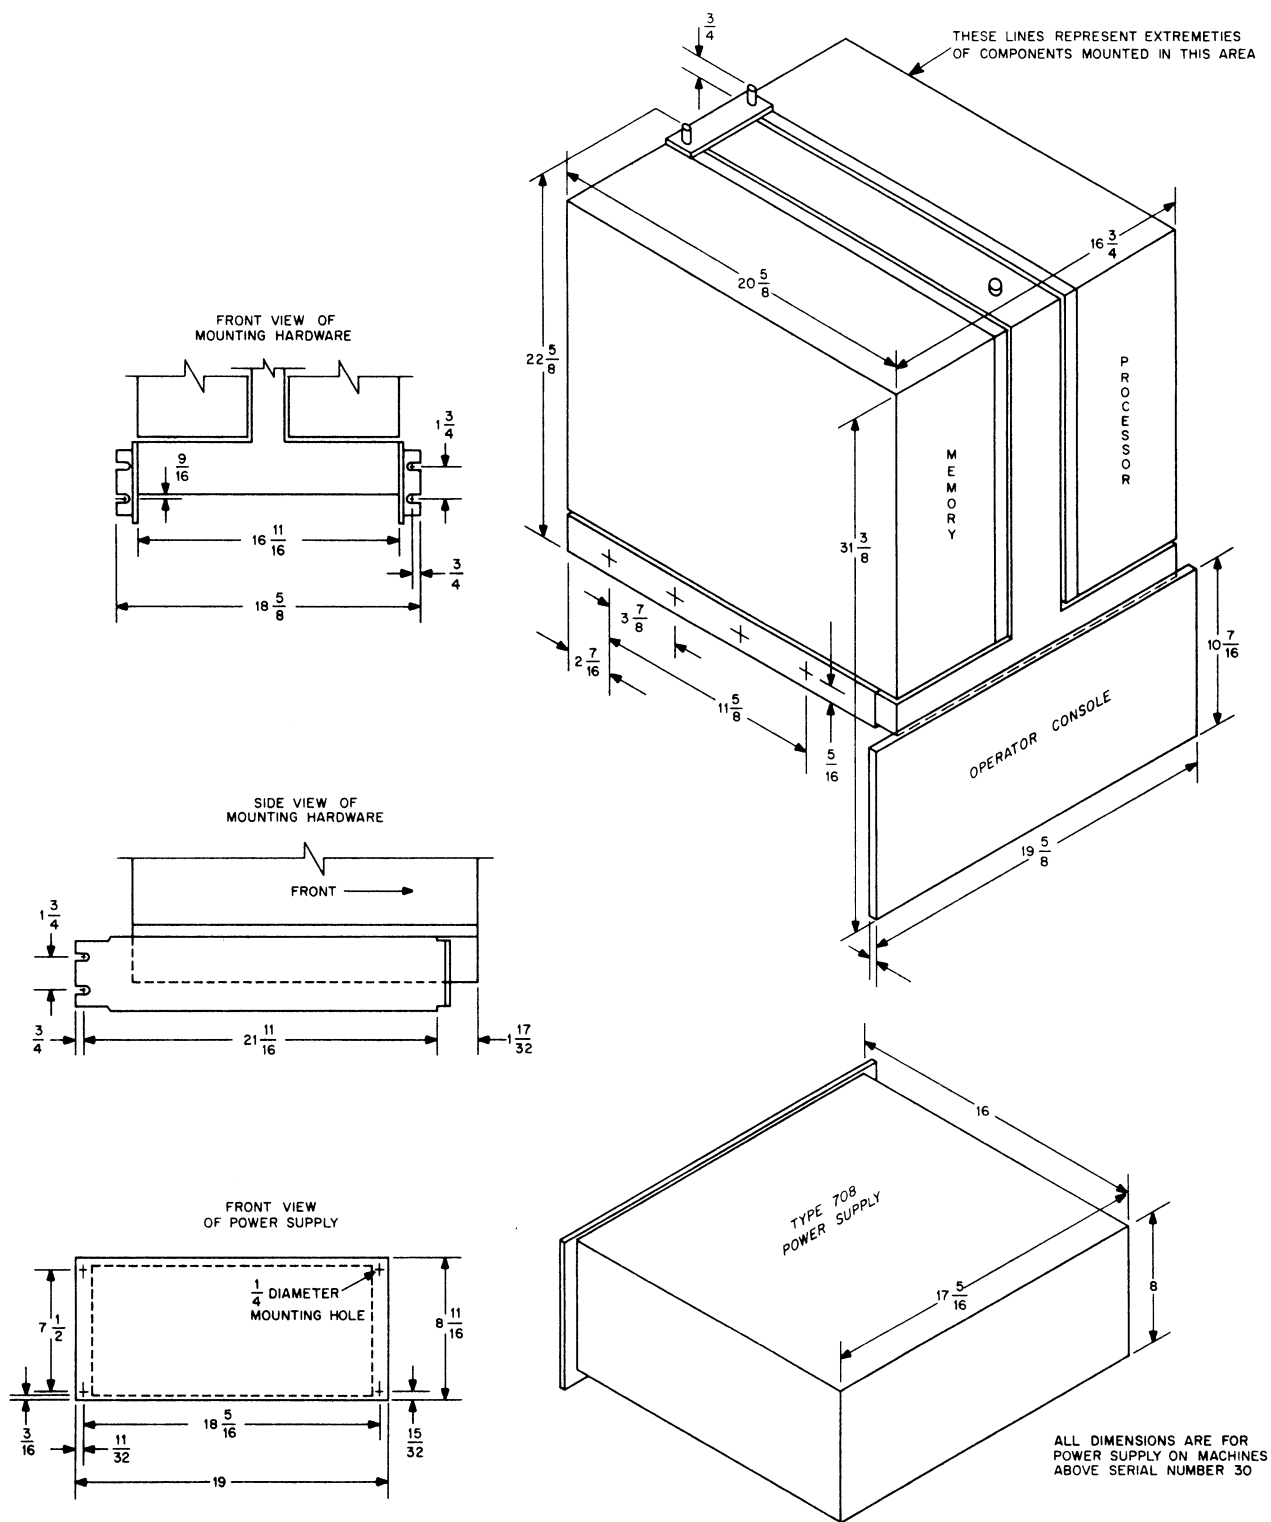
Cabinet-Mounted PDP-8 Installation Dimensions
